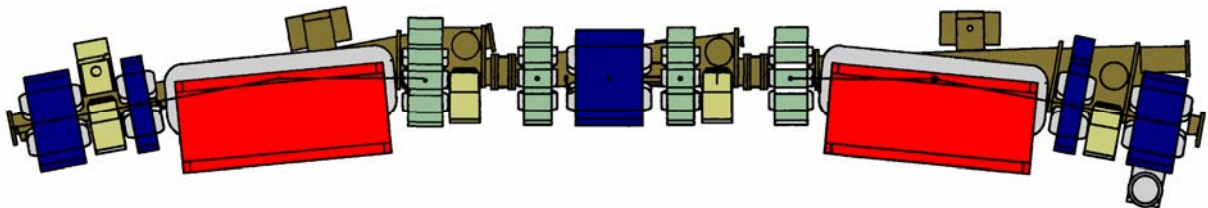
Plan View of Assembled Magnets and Vacuum Chambers
